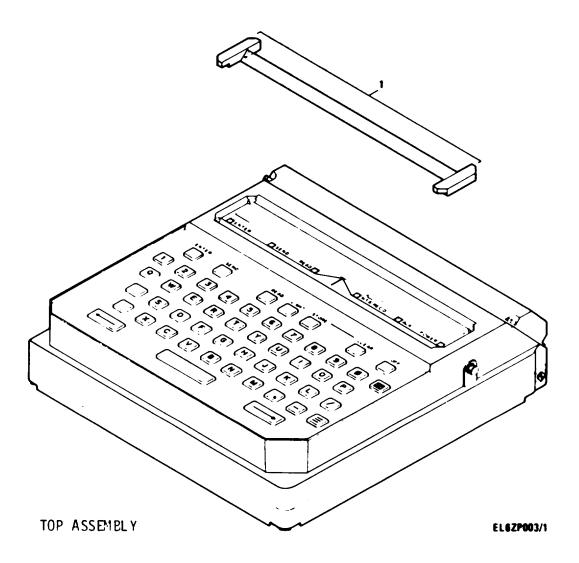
Keyer-Message Device KY-879/P (Sheet 1 of 3).
